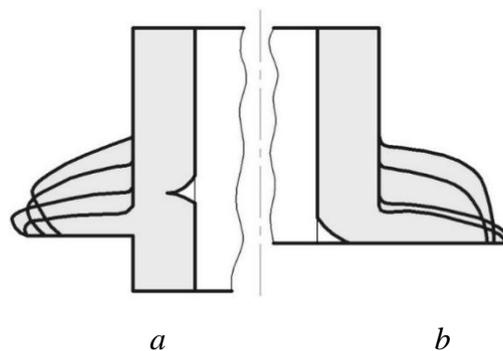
Contours of thickenings (a) and flanges (b) on a tubular workpiece
